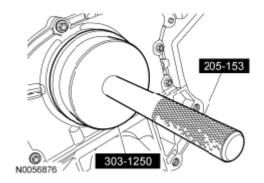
Identifying Rear Main Seal Installer On Crankshaft Courtesy of FORD MOTOR CO.
